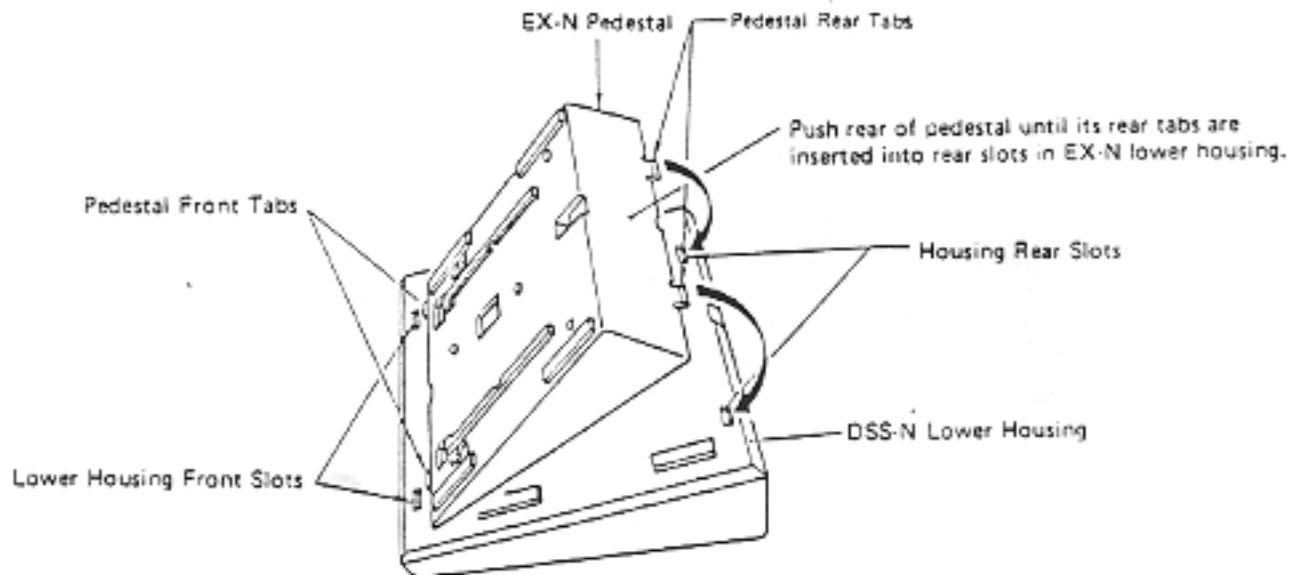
(1)(a)A 128K Pedestal Mounting
